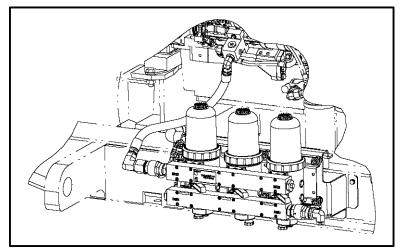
INSTALLED FUEL FILTER ASSEMBLY (TRIPEX FILTER SHOWN)
